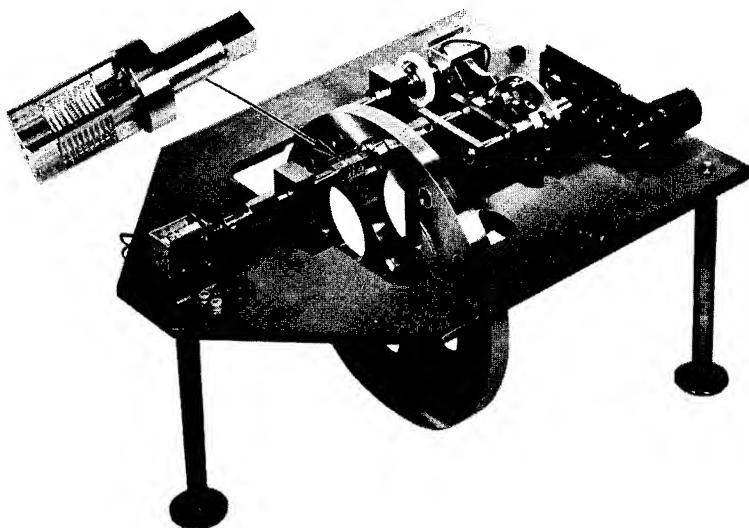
Multimicrowafer stack welding fixture.
